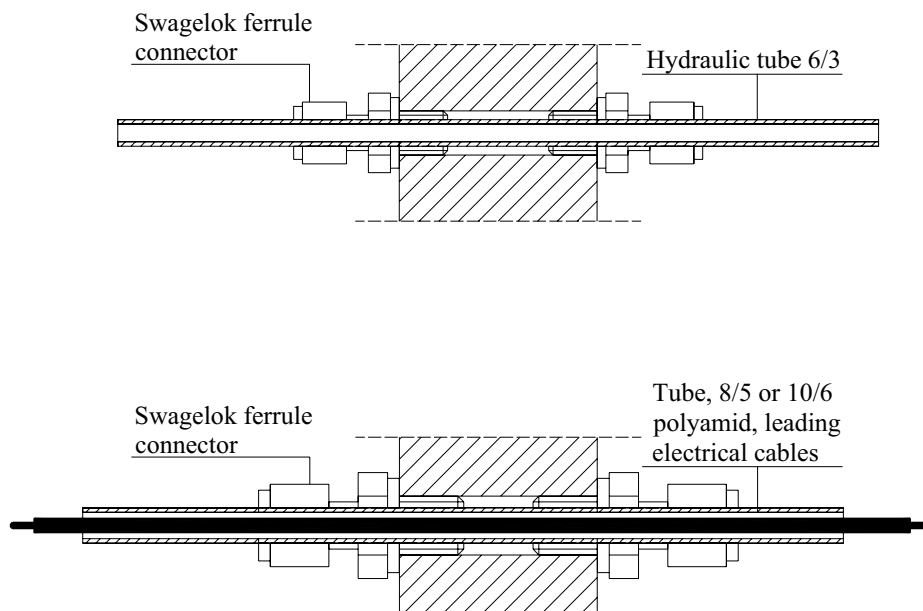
Schematic view, showing how the hydraulic tubes (upper) and electrical cables were sealed on their way through the head flanges.
